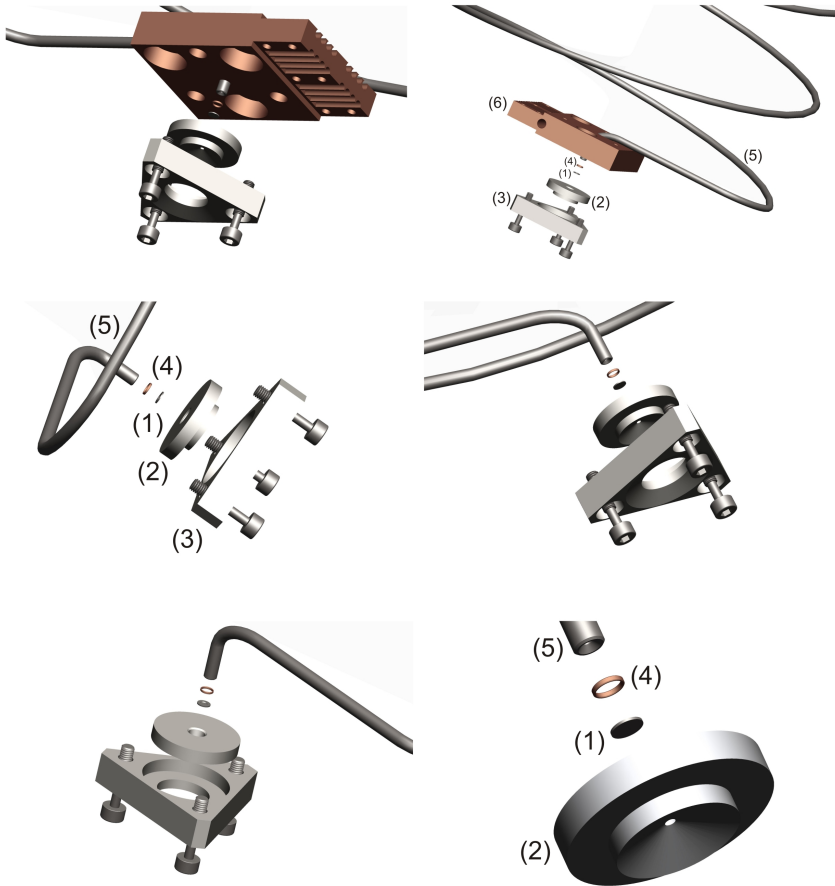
Exploded assembly drawing of the *nozzle disc* mounting. The *nozzle disc* (1) is placed in the *circular holding fixture* (2) and sealed by a *copper gasket* (4) against the high pressure *gas tube* (5). To tighten this sealing the *circular holding fixture* gets placed within the triangular shaped *nozzle retaining fixture* (3) which again is tightened by three M3 stainless steel screws into the copper made *nozzle-cooling block* (6). The stainless steel high pressure *gas tube* (5) on the other hand is mounted by a specially vacuum proofed soldering technique directly into this copper *nozzle-cooling block* (6).
